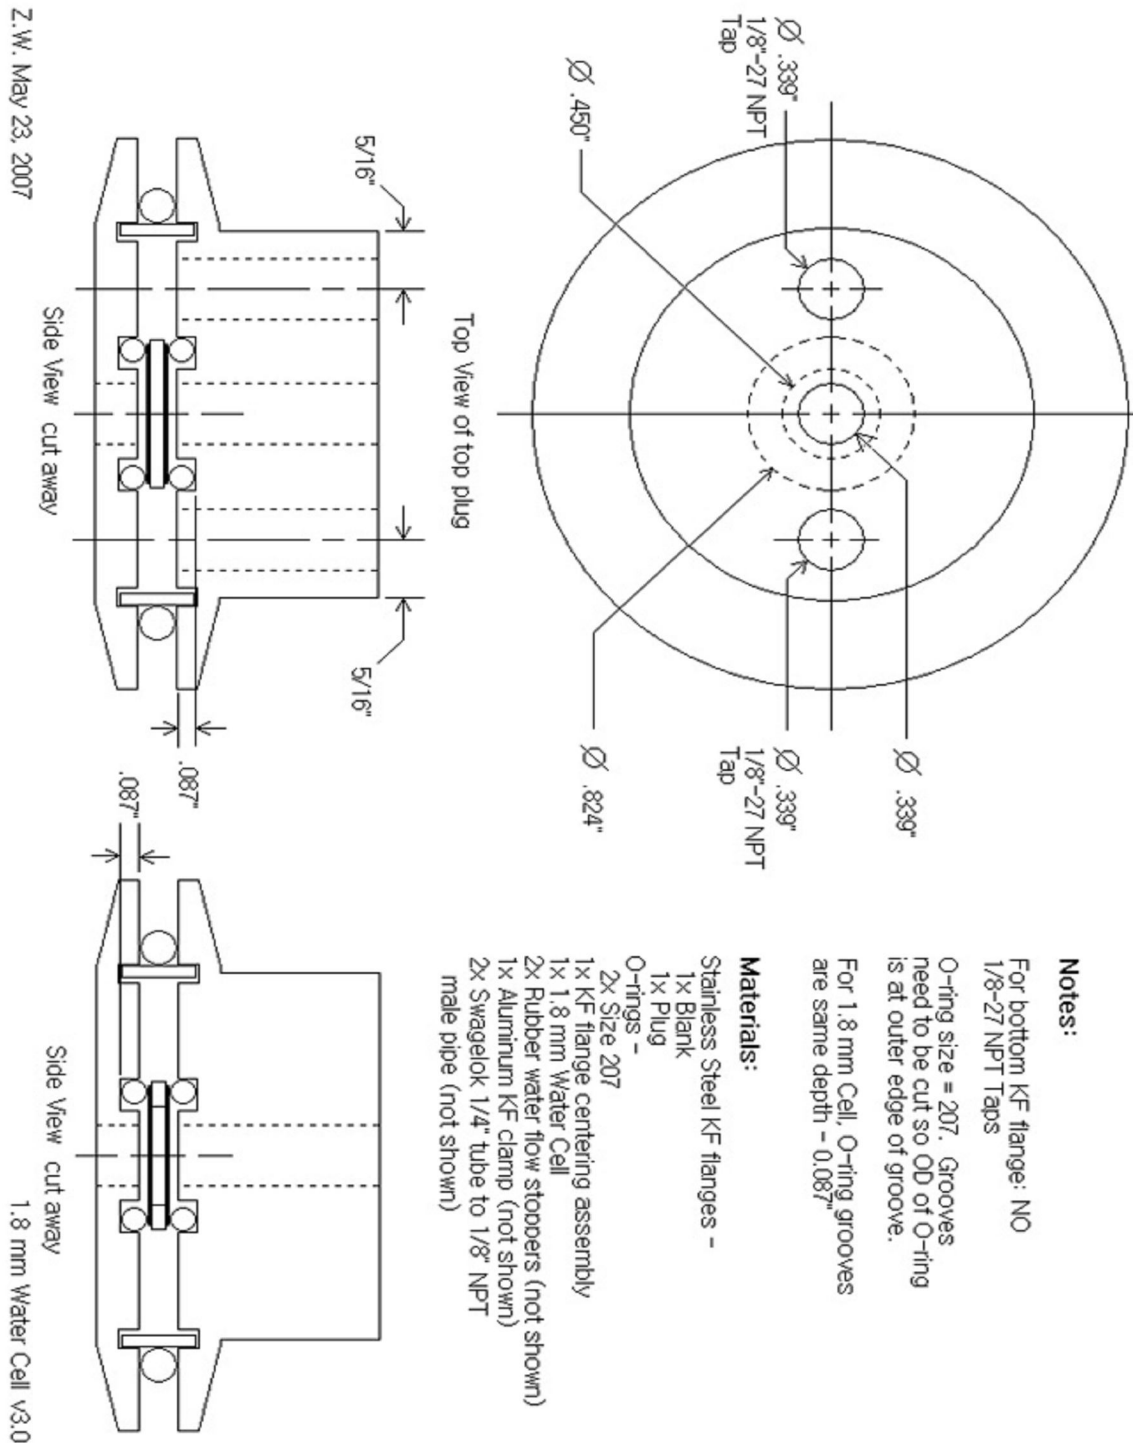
A schematic of the stainless steel water cell housing cut to hold the 1.8 mm water cell. It is made by compressing 2 stainless steel KF flanges with grooves, .087" deep cut for size 207 O-rings which seal against the water cell windows preventing leaking.
